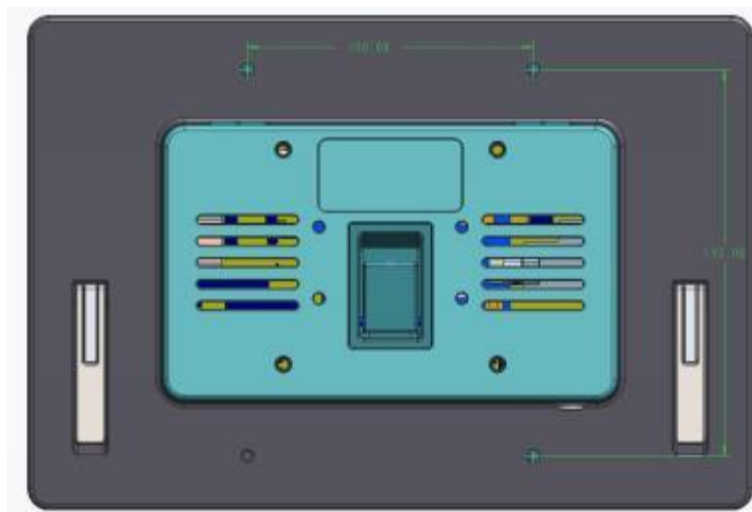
Q10 Mounting Hole Dimensions (100mm x 135mm)
